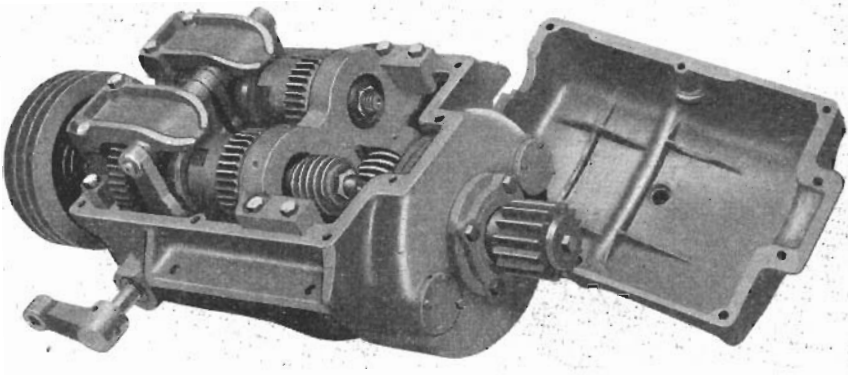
Assembly arrangement of Crown reversing gearbox.
